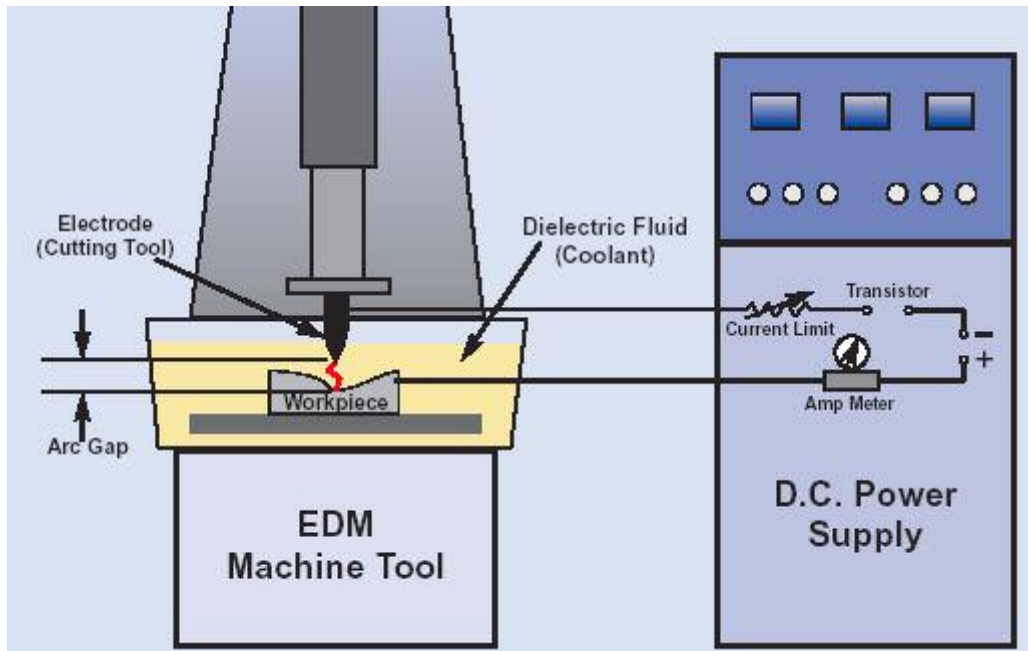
The electric discharge machine. The electrode and workpiece are held by the machine tool (left), which also contains the dielectric system. The power supply (right) controls the electrical discharges and the movement of the electrode in relation to the workpiece. [5]
